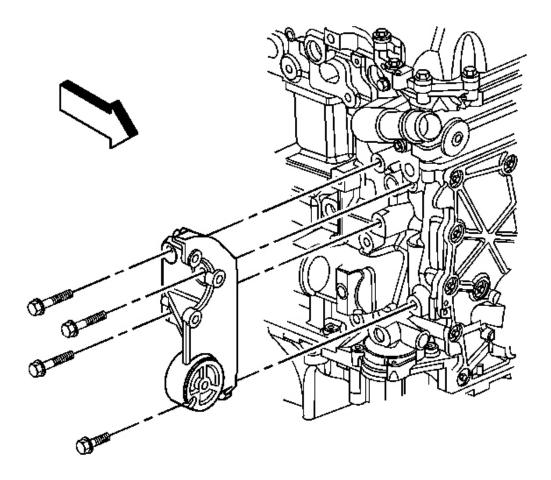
View Of Power Steering Pump Bracket & Mounting Bolts Courtesy of GENERAL MOTORS CORP.
